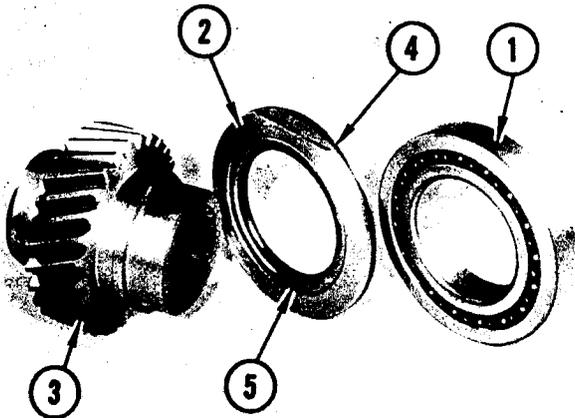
ALL SPEED GEAR ASSEMBLY
